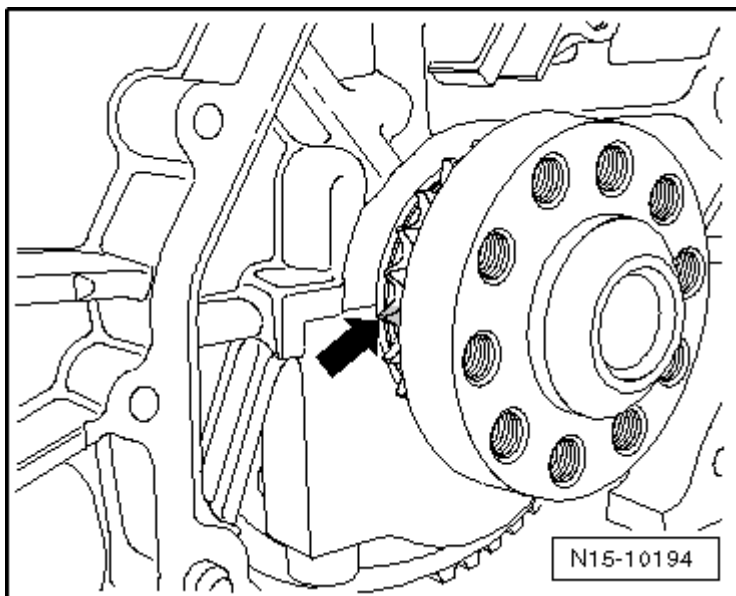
Identifying Crankshaft Set To TDC Cylinder 1
